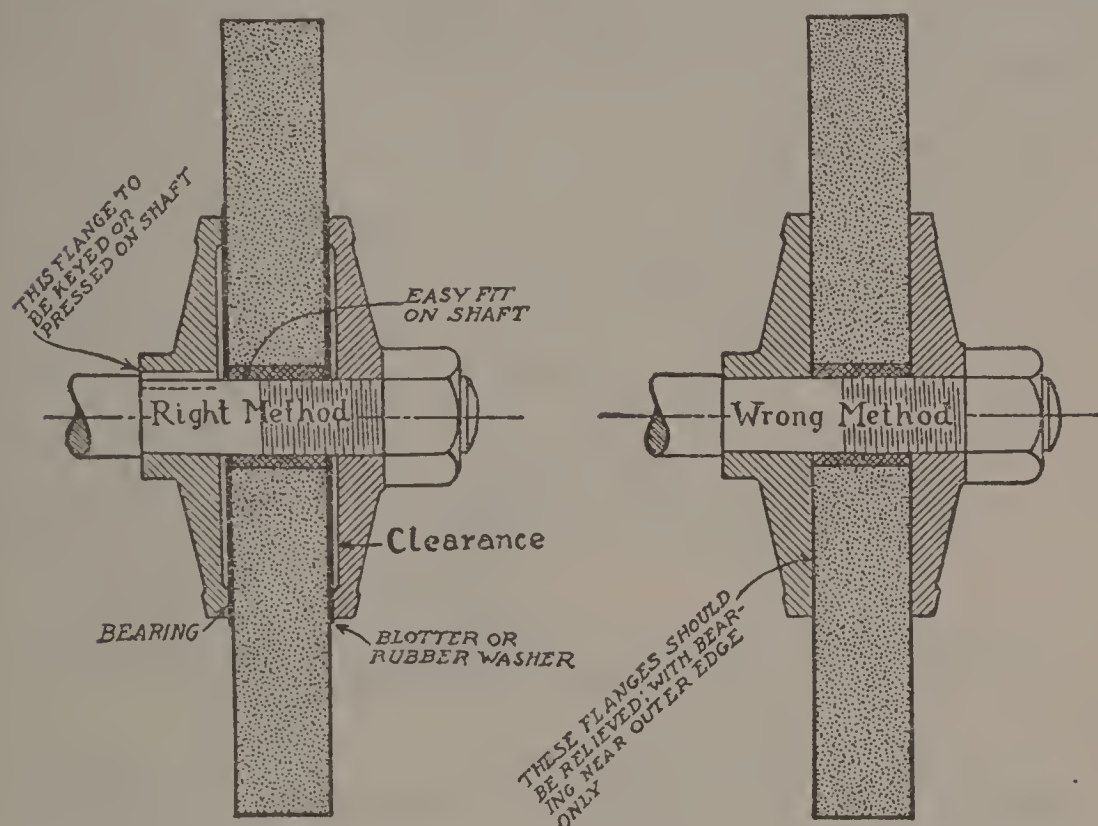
RIGHT AND WRONG METHODS OF MOUNTING WHEEL
